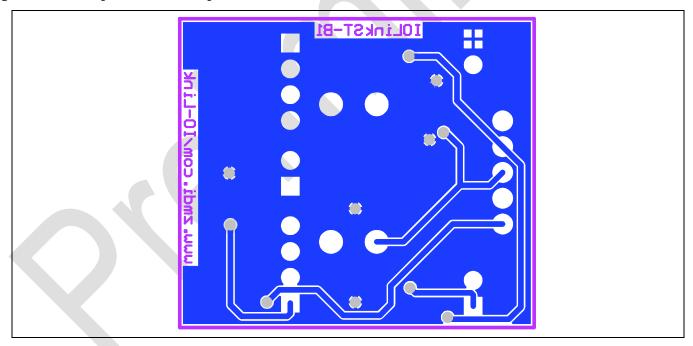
Layout Bottom Layer ZIOL2401 Starter Kit Extension Board
